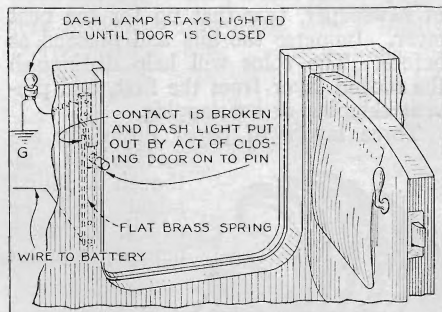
A switch installed in your car will tell instantly whether all doors are locked.
